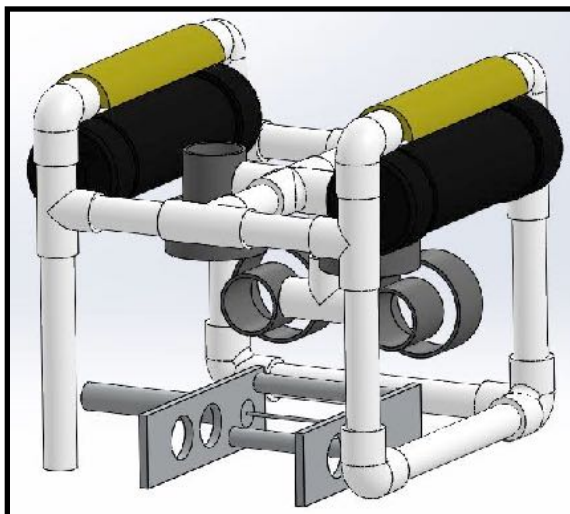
CAD drawing of Kumu using Solidworks' CAD software. (Credit: E. Schlitzkus)
